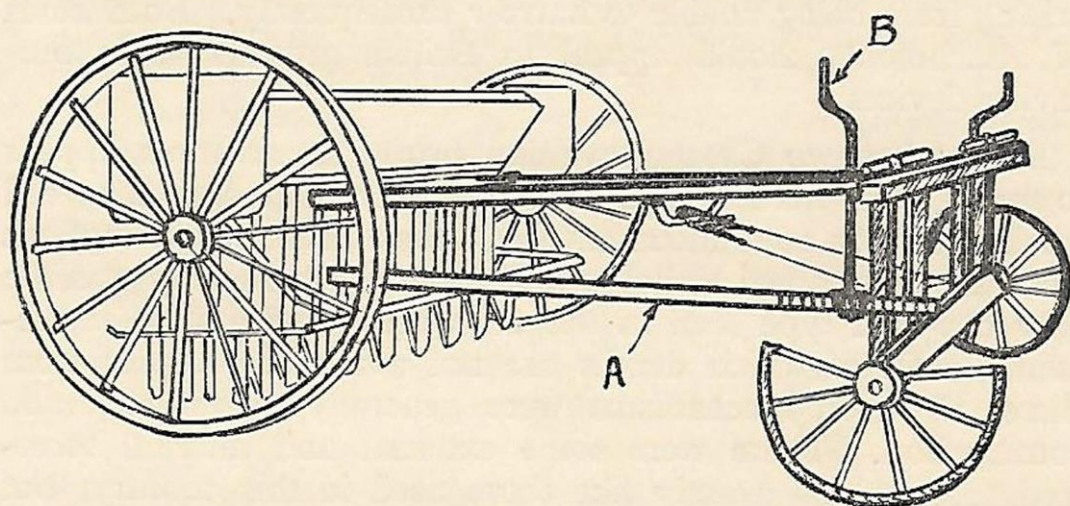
DRILL WITH " RACK AND PINION " FORECARRIAGE STEERING.
